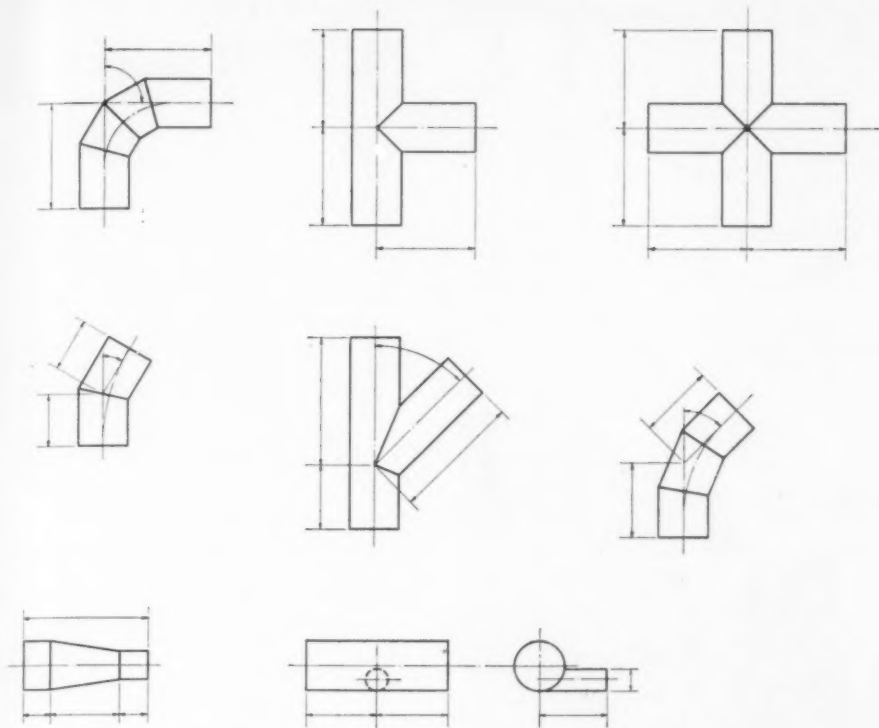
Typical Fittings With Ends for Dresser Couplings
